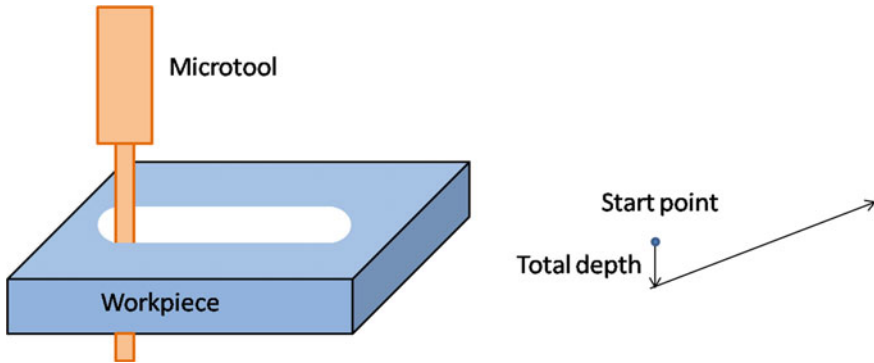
Sinking and milling microtool movement strategy for 3D EMM
